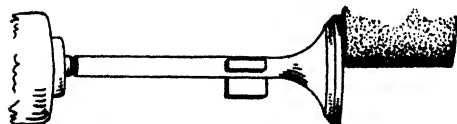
A.—Here the head is supported between adjustable guide shoes.
